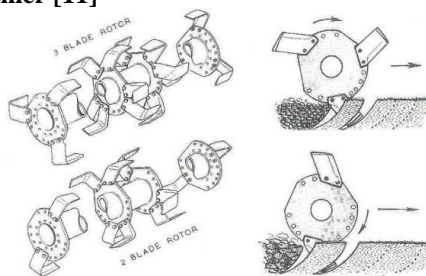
Rotary tiller rotors with L-type blades showing methods of mounting and cutting [6]
